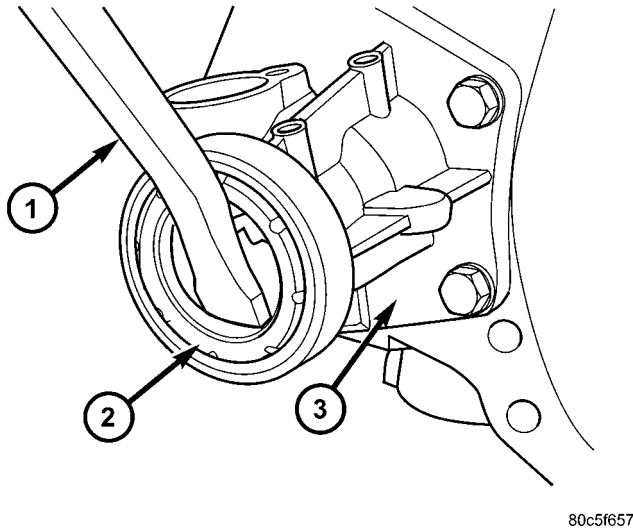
Axle Seal Removal (Extension Housing Side Shown)
